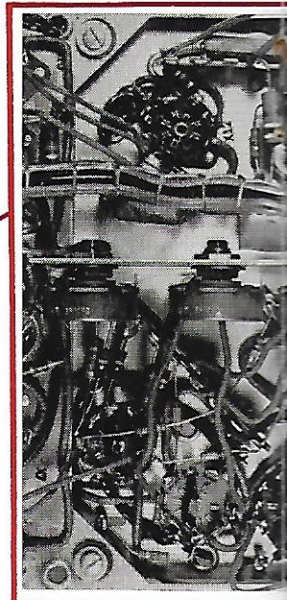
Detail view of chassis bearing Y-amplifier. This method of assembly minimizes shock and vibration which would otherwise interfere with operation.
